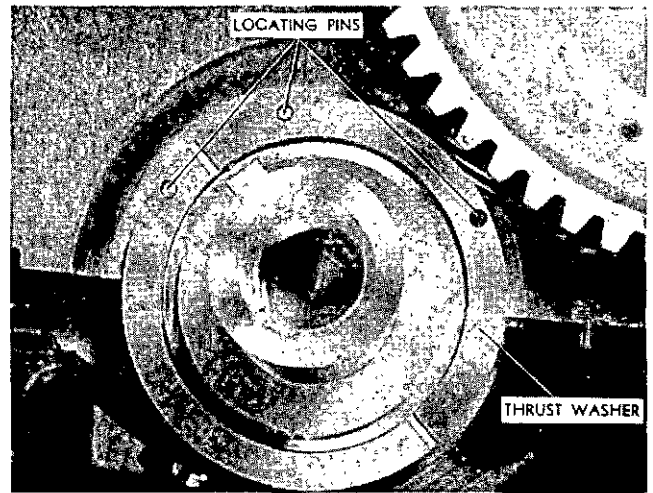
Crankshaft Thrust Washer (Front Bearing Thrust)
